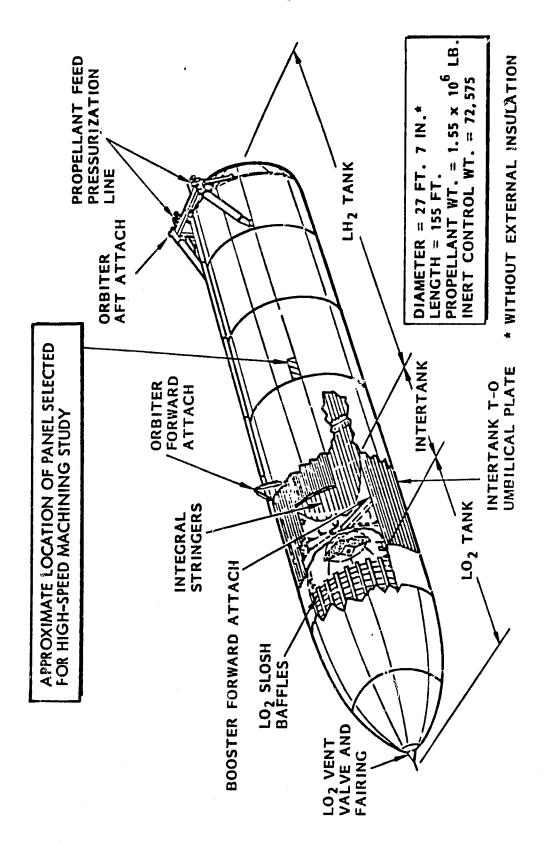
Detail of Space Shuttle External Fuel Tank
